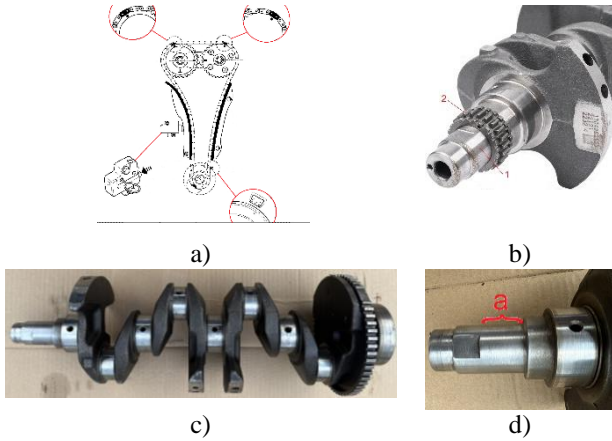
The crankshaft of the analyzed ICE. a) scheme of the toothed belt drive of the engine cam valvetrain, b) the crankshaft journal 1 mating with toothed pulley 2, c) general view of the analyzed crankshaft, d) the crankshaft journal surface mating with toothed pulley bore at length "a"
